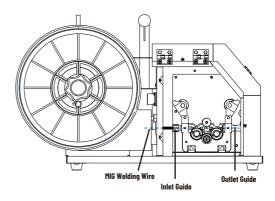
Inserting Wire into the Wire Feed Mechanism
